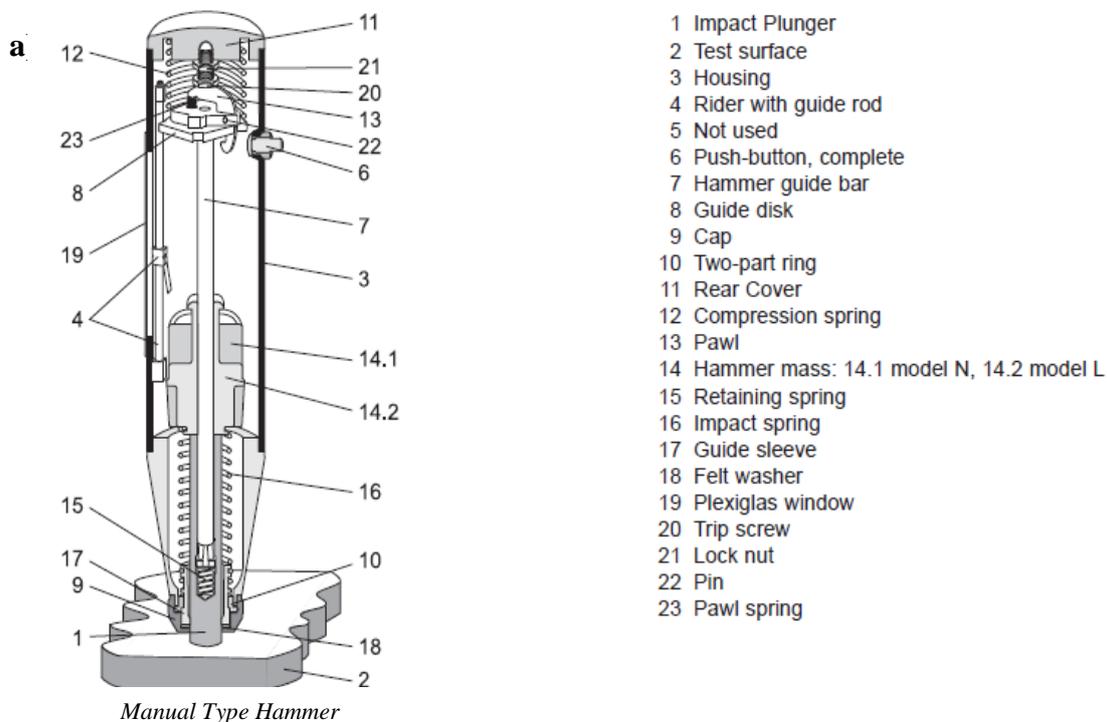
Mechanical Parts of a Concrete Test Hammer
